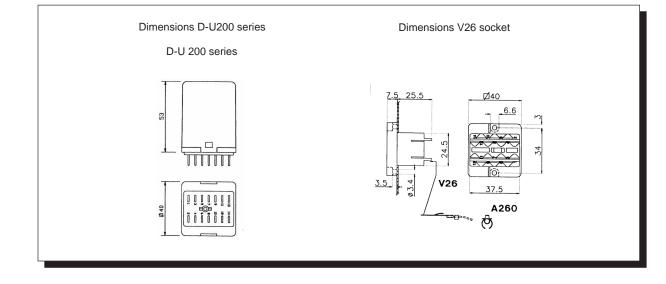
panel mount socket and rear wiring of relay with crimp contacts.
